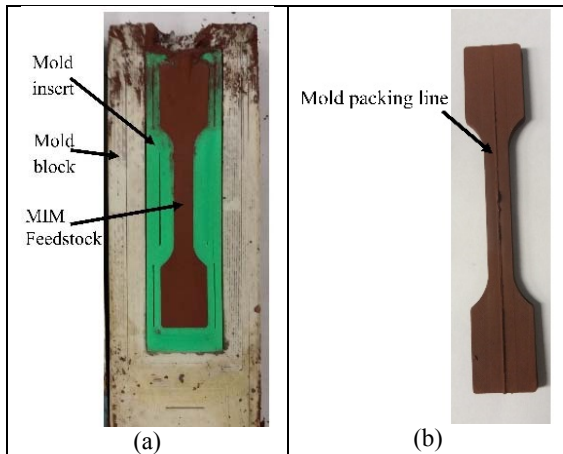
(a) MIM using bronze-PLA mold insert; (b) MIM part.
